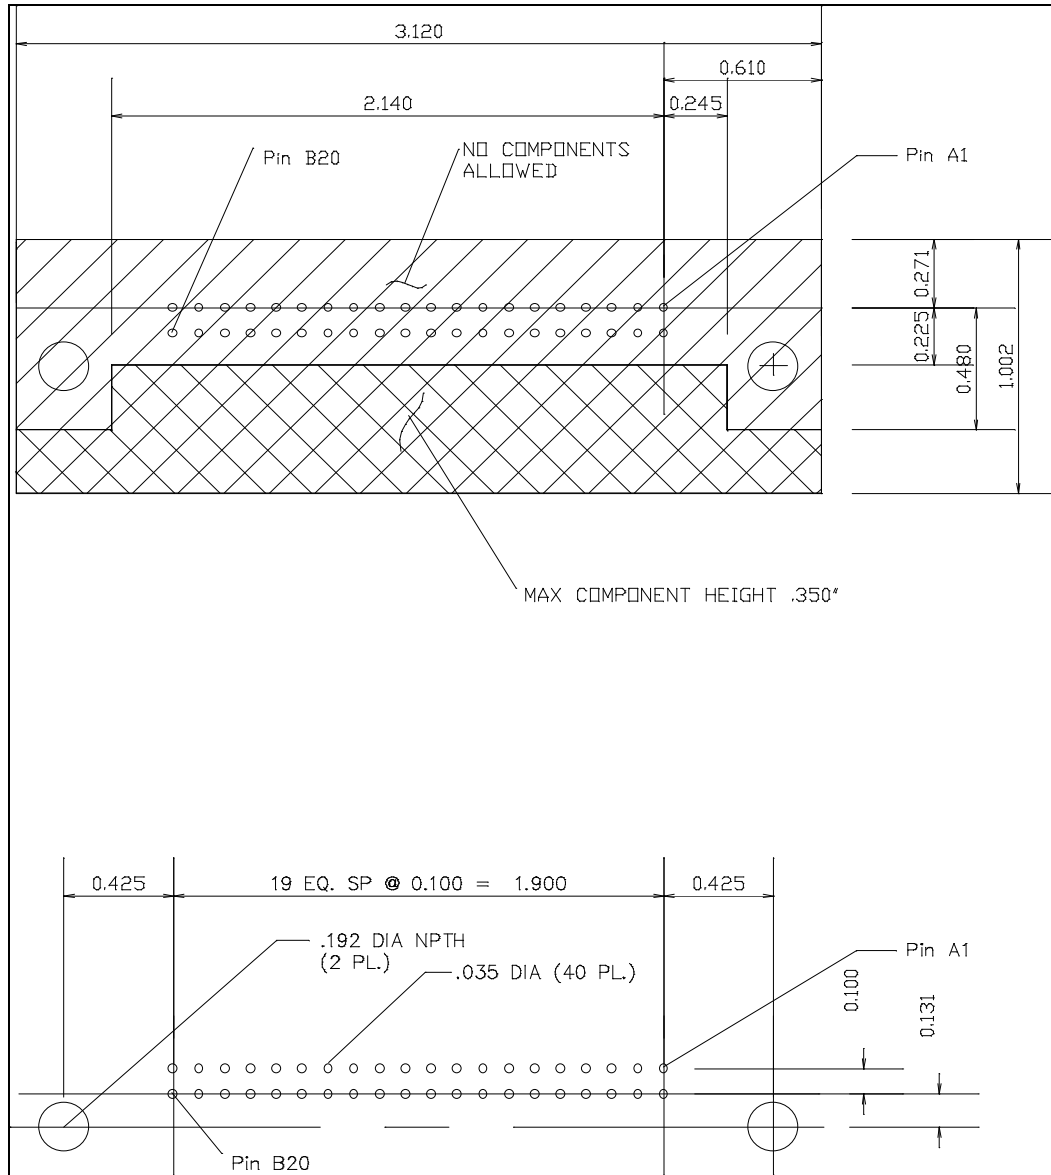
Alternative Mounting Configuration - Baseboard Pattern (Top View, Dimensions in Inches)
